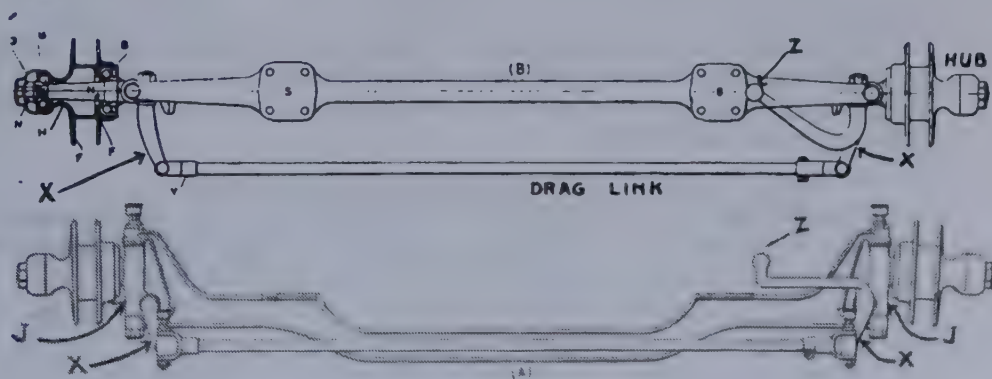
Top and side view of a Front Axle and Steering Knuckle and Connections.
